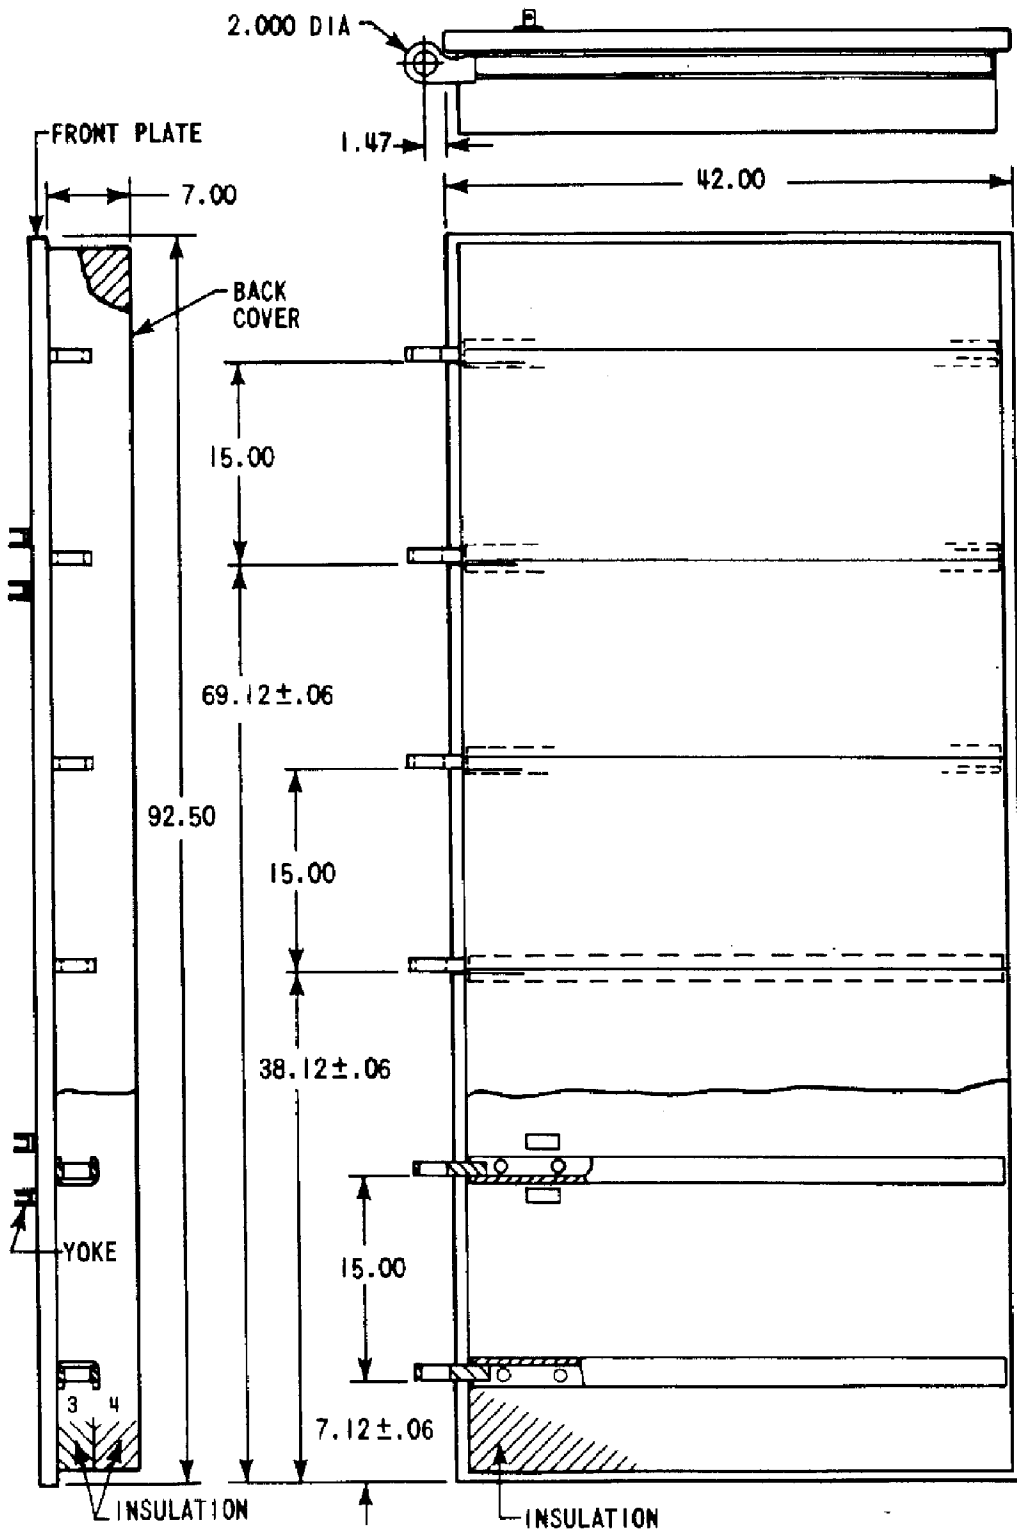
Lower Inlet Door Shock Absorber Assembly
